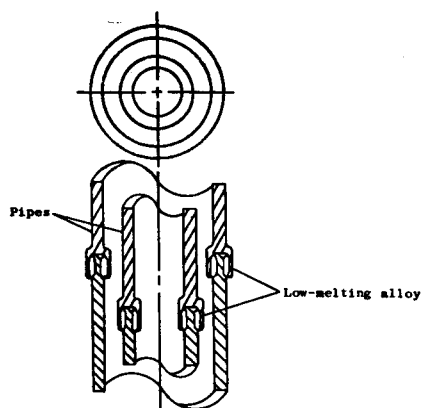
Boltless joining used in concentric pipe assembly (ref. 45).
